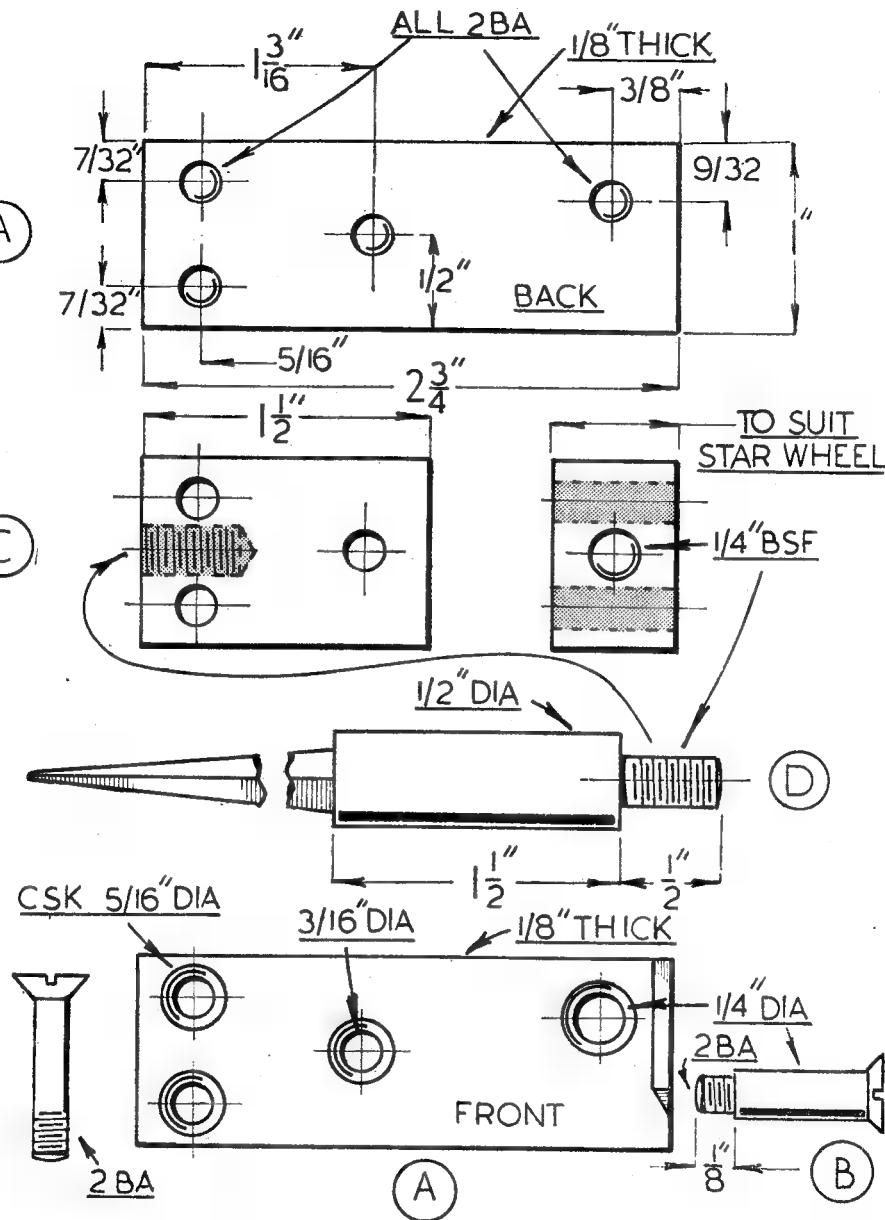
"A"—the side members and fixing screws ; "B"—the wheel pivot ; "C"—the distance-piece ; "D"—the handle shaft
